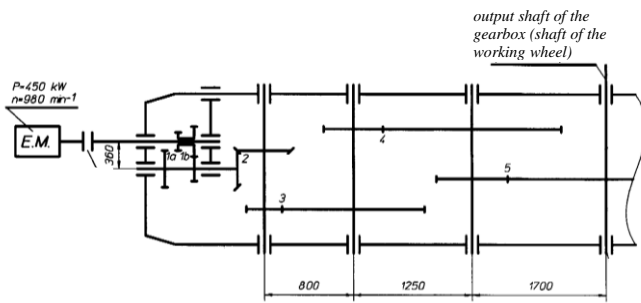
Scheme of the gearbox speed reducer with the working wheel of the excavator SRs-630
